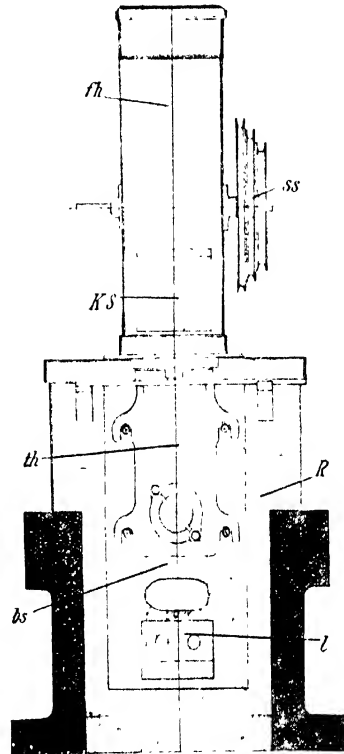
Supply arrangement and body of the Exter press. Back view.
